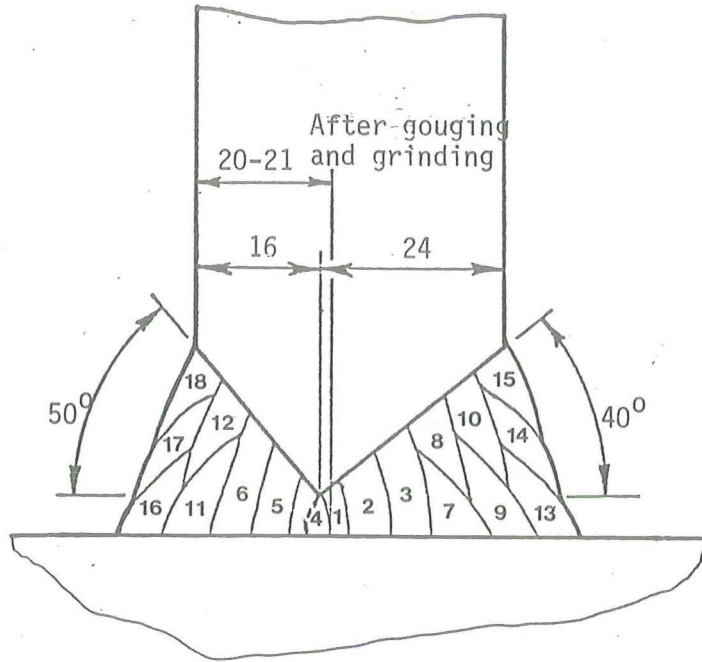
Build-up sequence of 40 mm full penetration welds .
